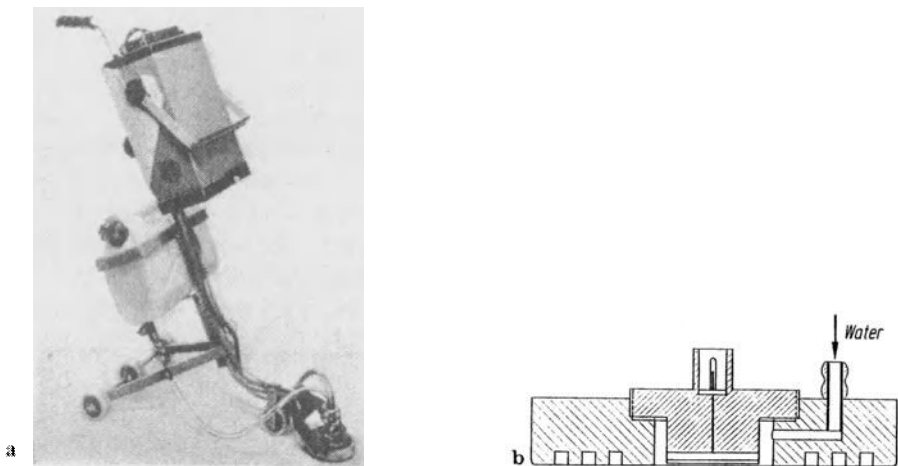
Plate tester, design Krautkrämer, photograph and schematic cross-section
